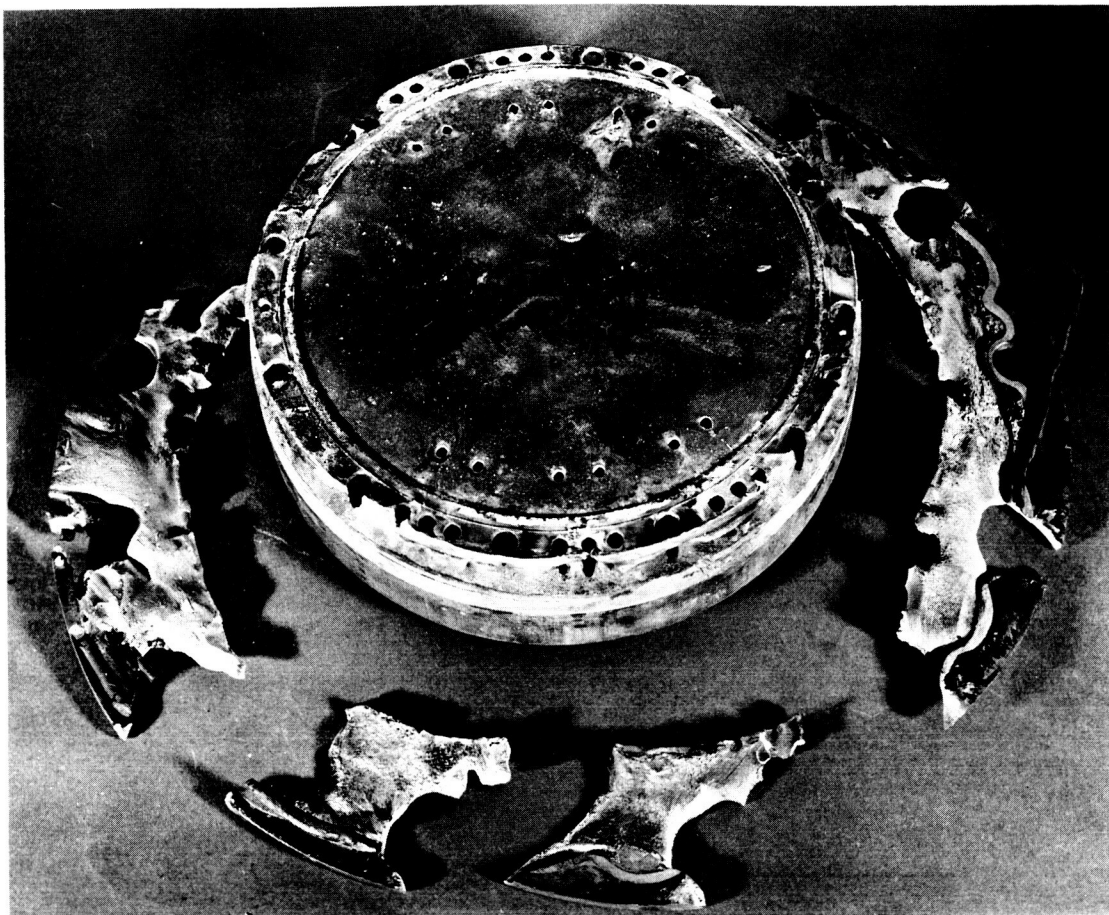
OXYGEN END PLATE AFTER EXPLOSION
